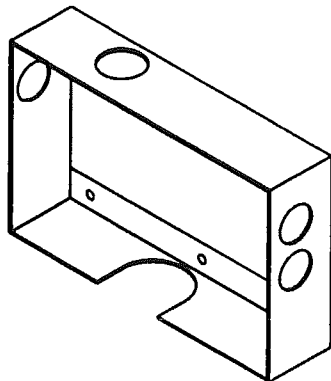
Model MB-P2 - Control Head Mounting Bracket.
